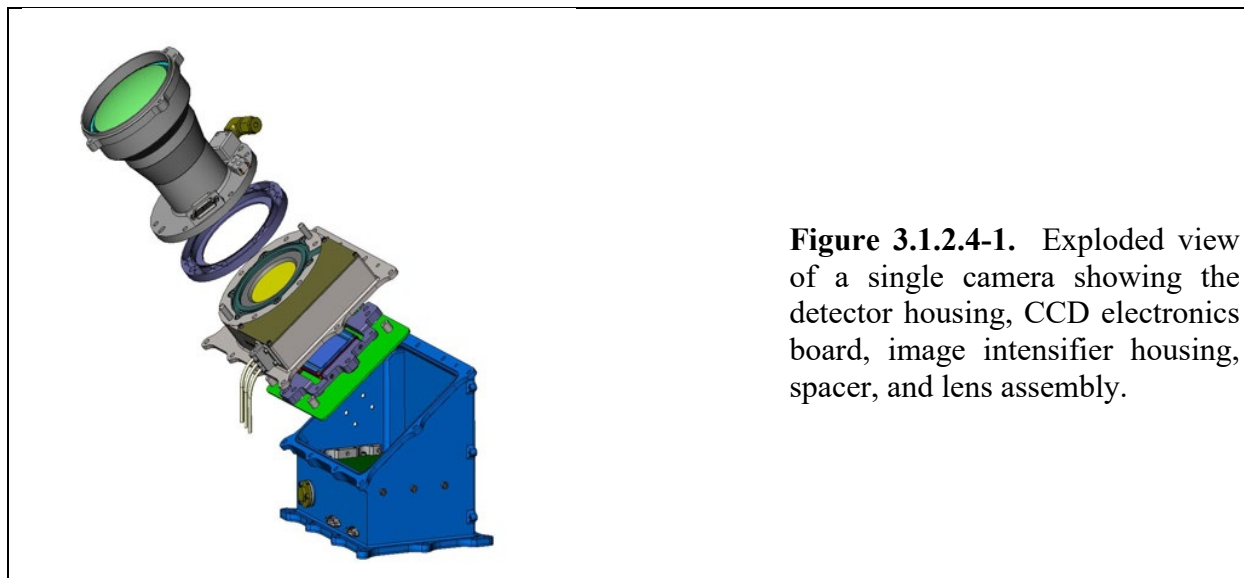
Exploded view of a single camera showing the detector housing, CCD electronics board, image intensifier housing, spacer, and lens assembly.
